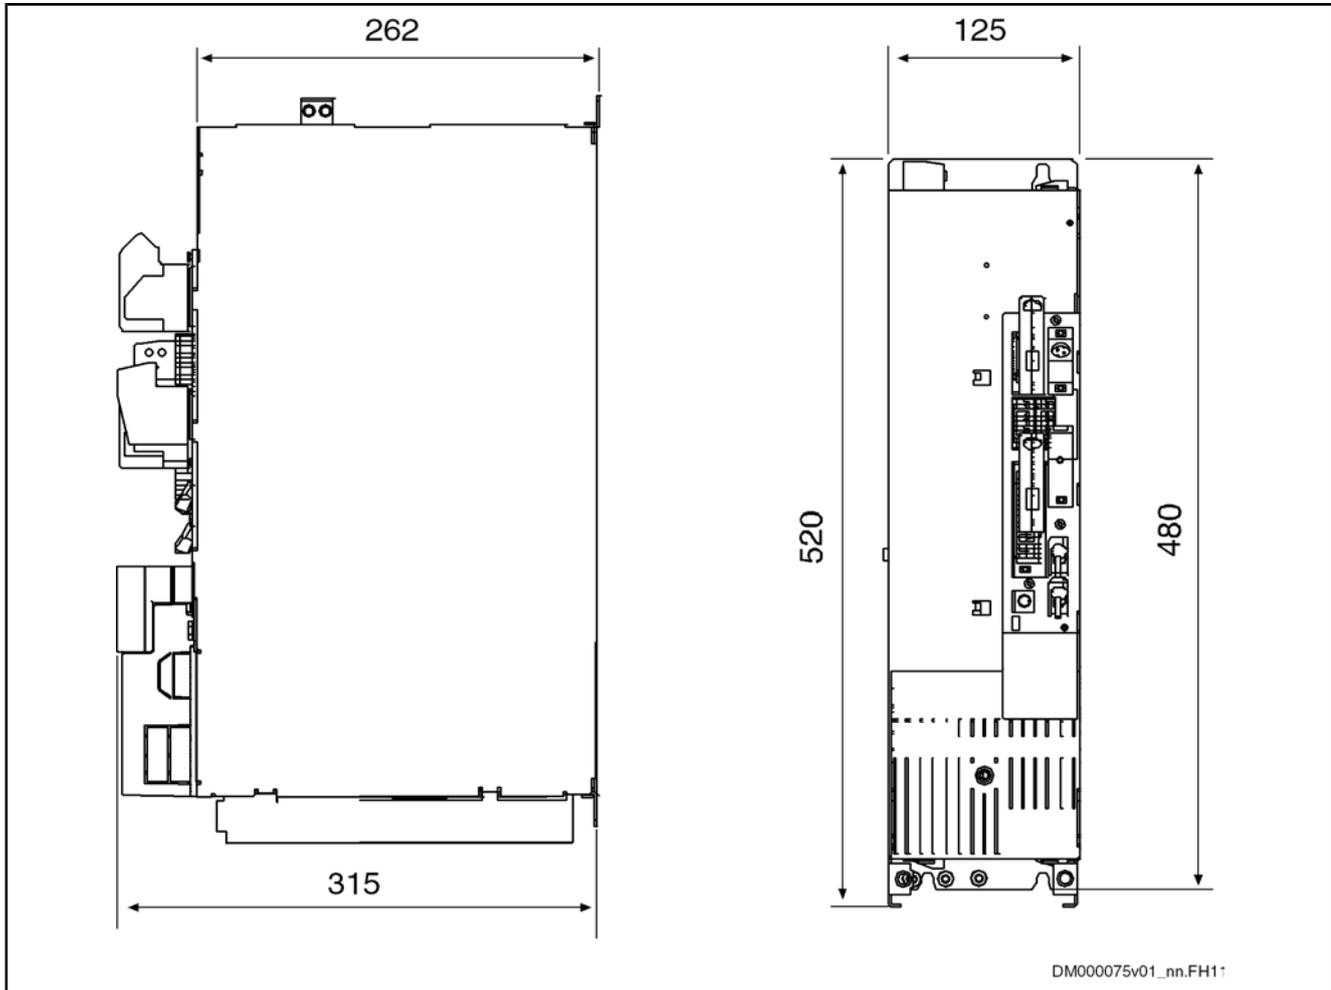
Dimensional drawing HCS03.1E-W0070
